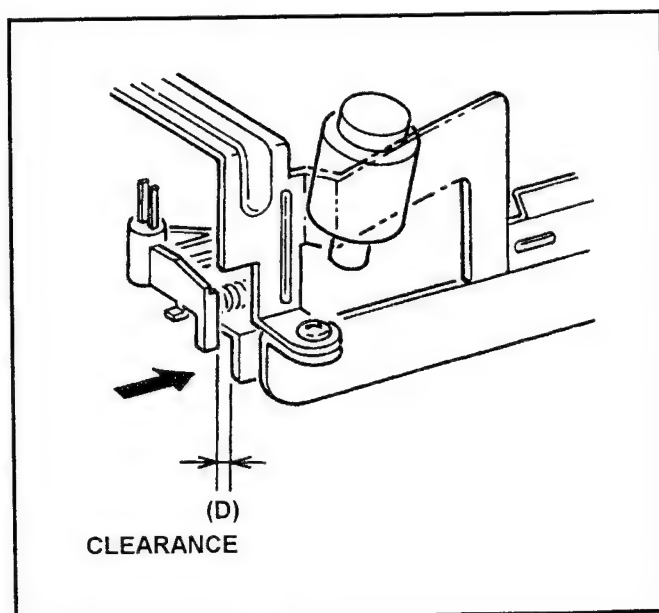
Cleaner Solenoid Position Adjustment
